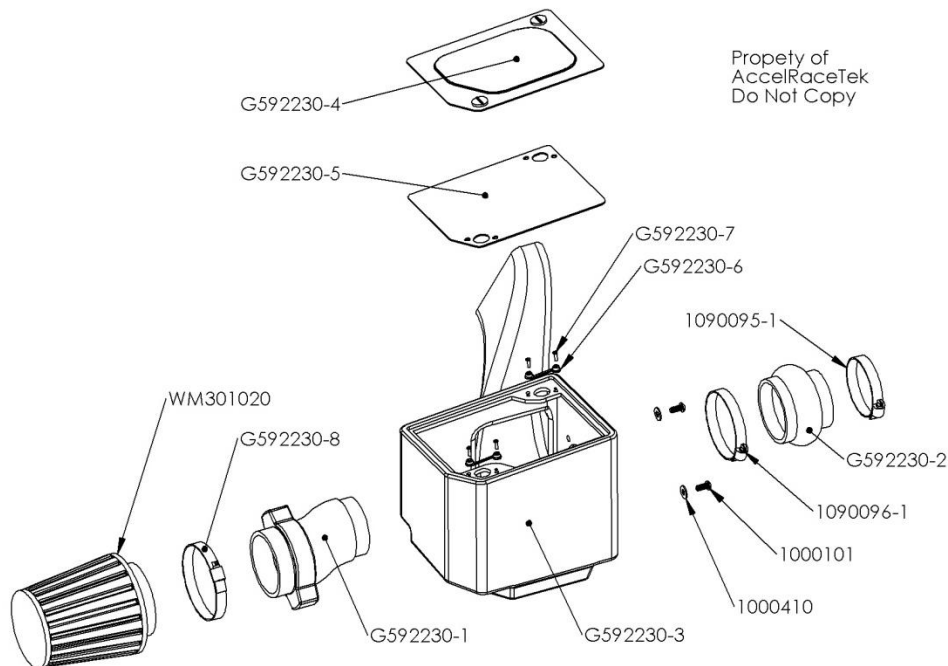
Air Cleaner Sub-Assembly Exploded View
